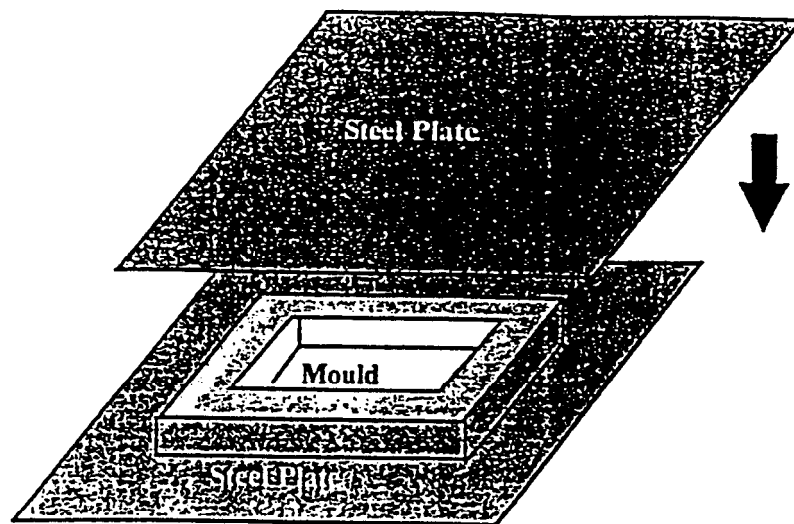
Schematic drawing of fiber pressing mold for hot press.
